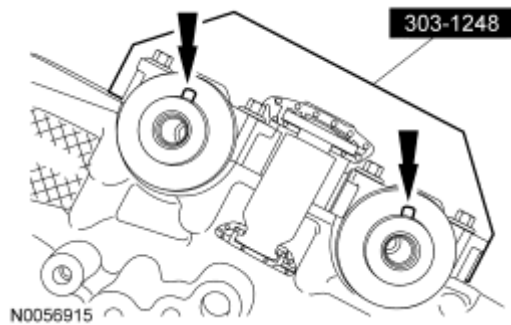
Installing Special Tool (303-1248) On Flats Of Camshafts
